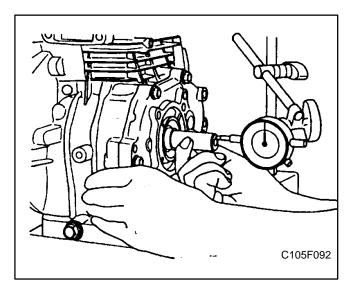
SIDE CLEARANCE OF CRANKSHAFT
